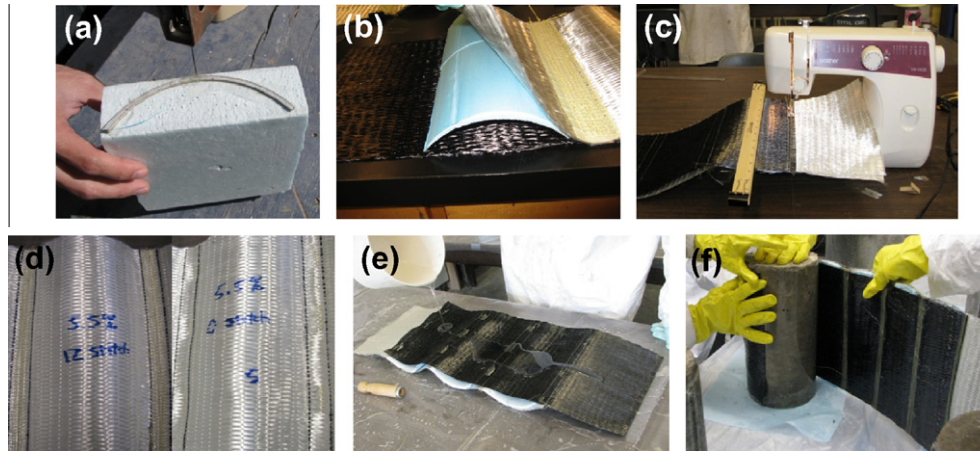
Manufacturing process: (a) cutting core inserts, (b) forming bistable segment, (c) sewing, (d) finished stitching, (e) application of epoxy binder and (f) wet lay-up.
